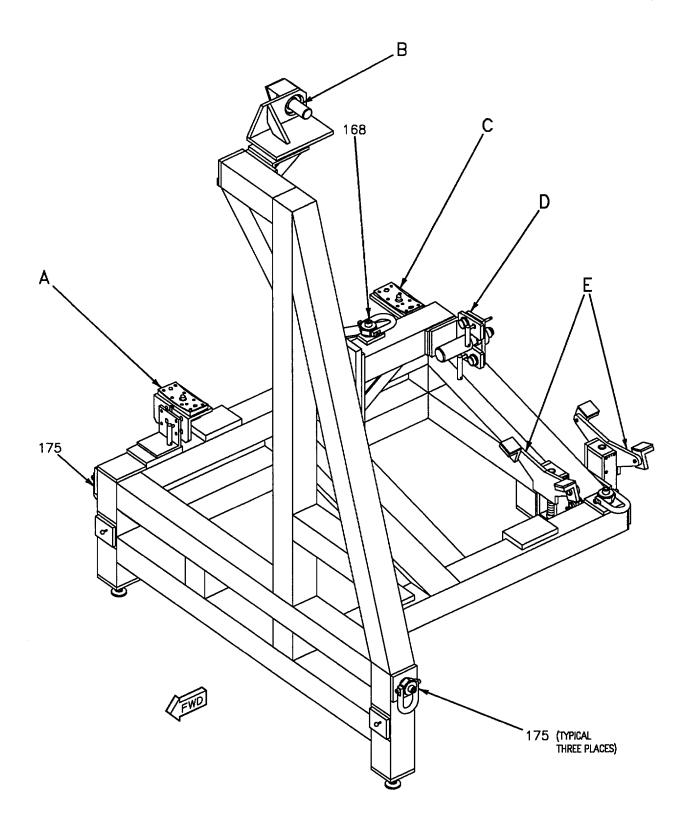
Engine Air Inlet Installation Alignment Fixture; RE474322020-1/-2 (Sheet 1)
